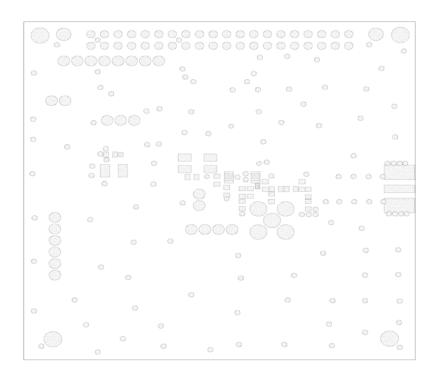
Infineon Evaluation Board V1.1 top side, solder mask
